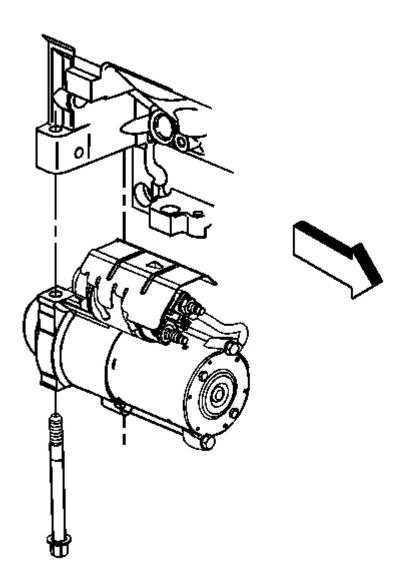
View Of Starter Solenoid Lead & Nut Courtesy of GENERAL MOTORS CORP.
